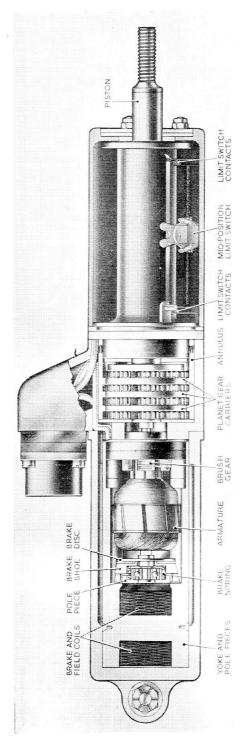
Fig. I. Sectional view of actuator, Type EJ50, Mk. 24
